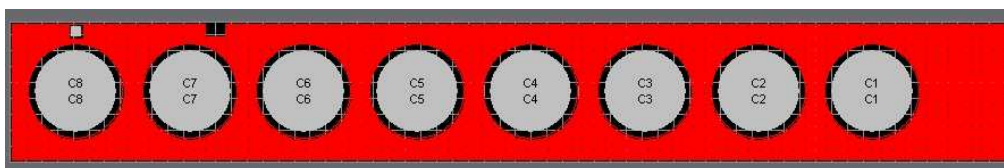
top view of the Base gerber file with guard ring (red part)
